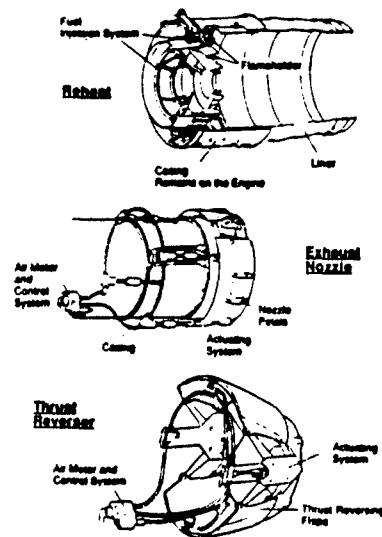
Engine Components to be removed for the Ejector Version (RB199-Mk103)
